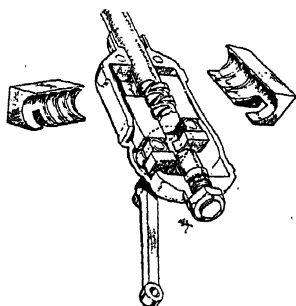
Half-nut Right and Left Hand Screw Type.
